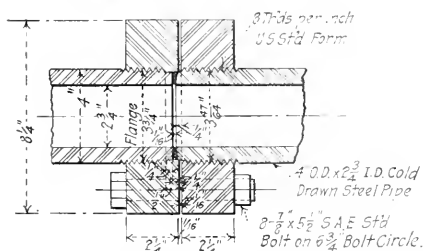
TYPICAL FLANGED JOINT FOR 7500 LB. PER SQ. IN.
